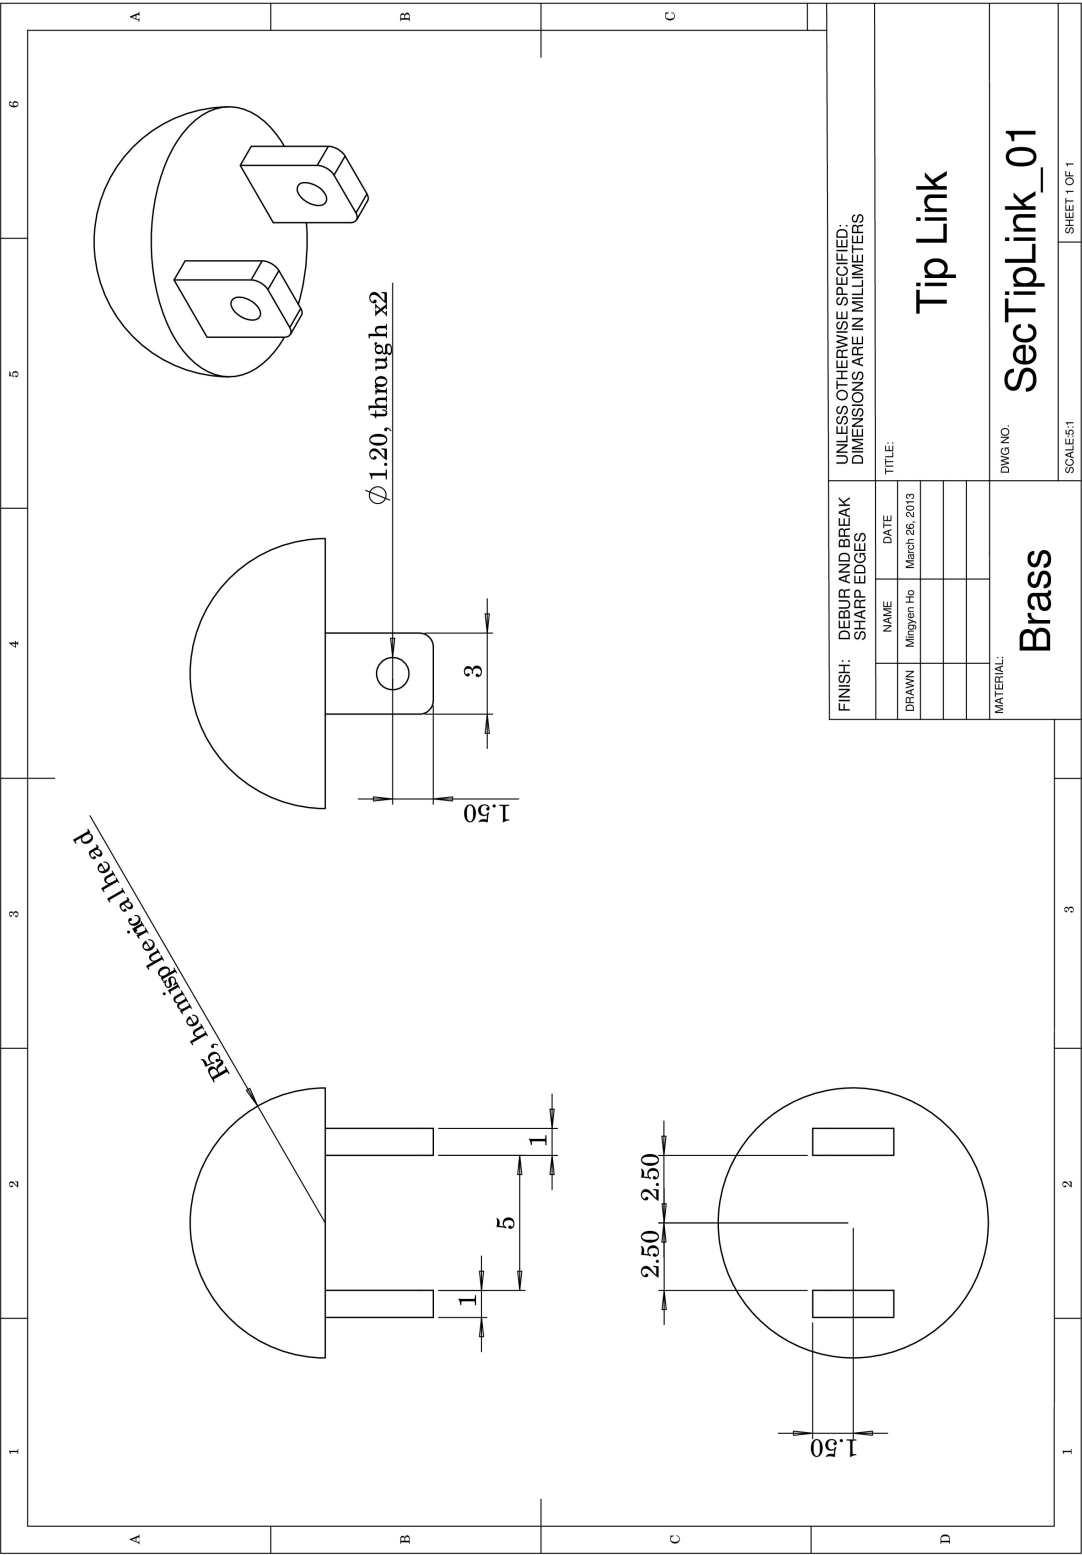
Engineering drawing of the tip link of the SMA wire actuated MINIR.
